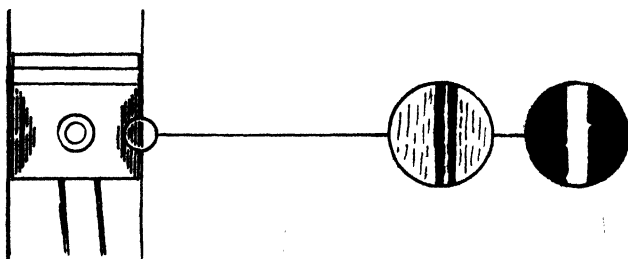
Sketch showing the value of surface finishing piston and cylinder bore. Note the oil pockets below the maximum bearing surface. These pockets ensure the adhesion of oil to the working surfaces.
